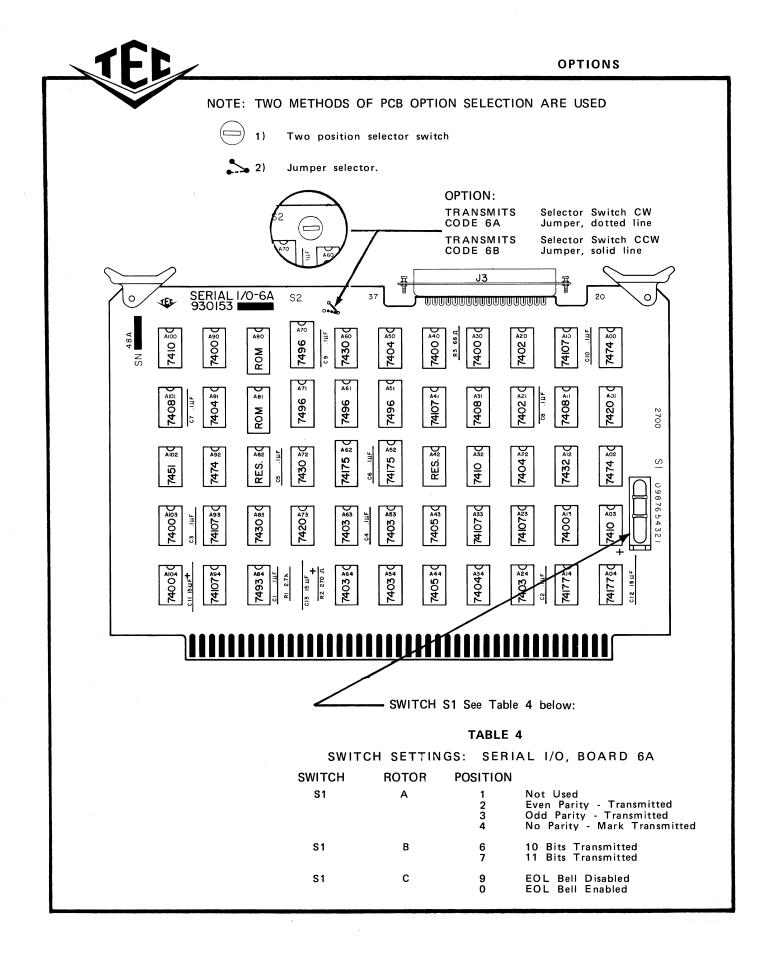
SWITCH OPTIONS, SERIAL I/O 6A PCB
